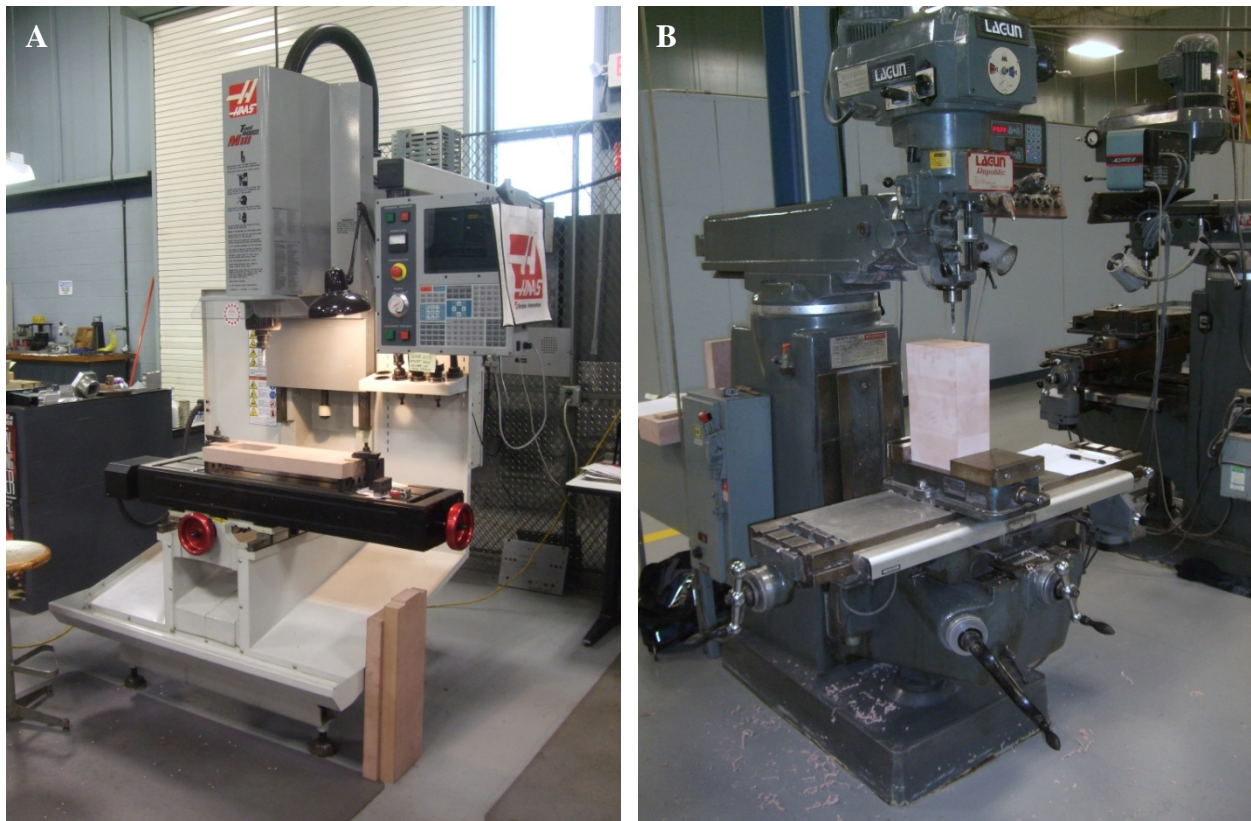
Equipment used to fabricate the mold. (a) CNC machine; (b) vertical milling machine.
